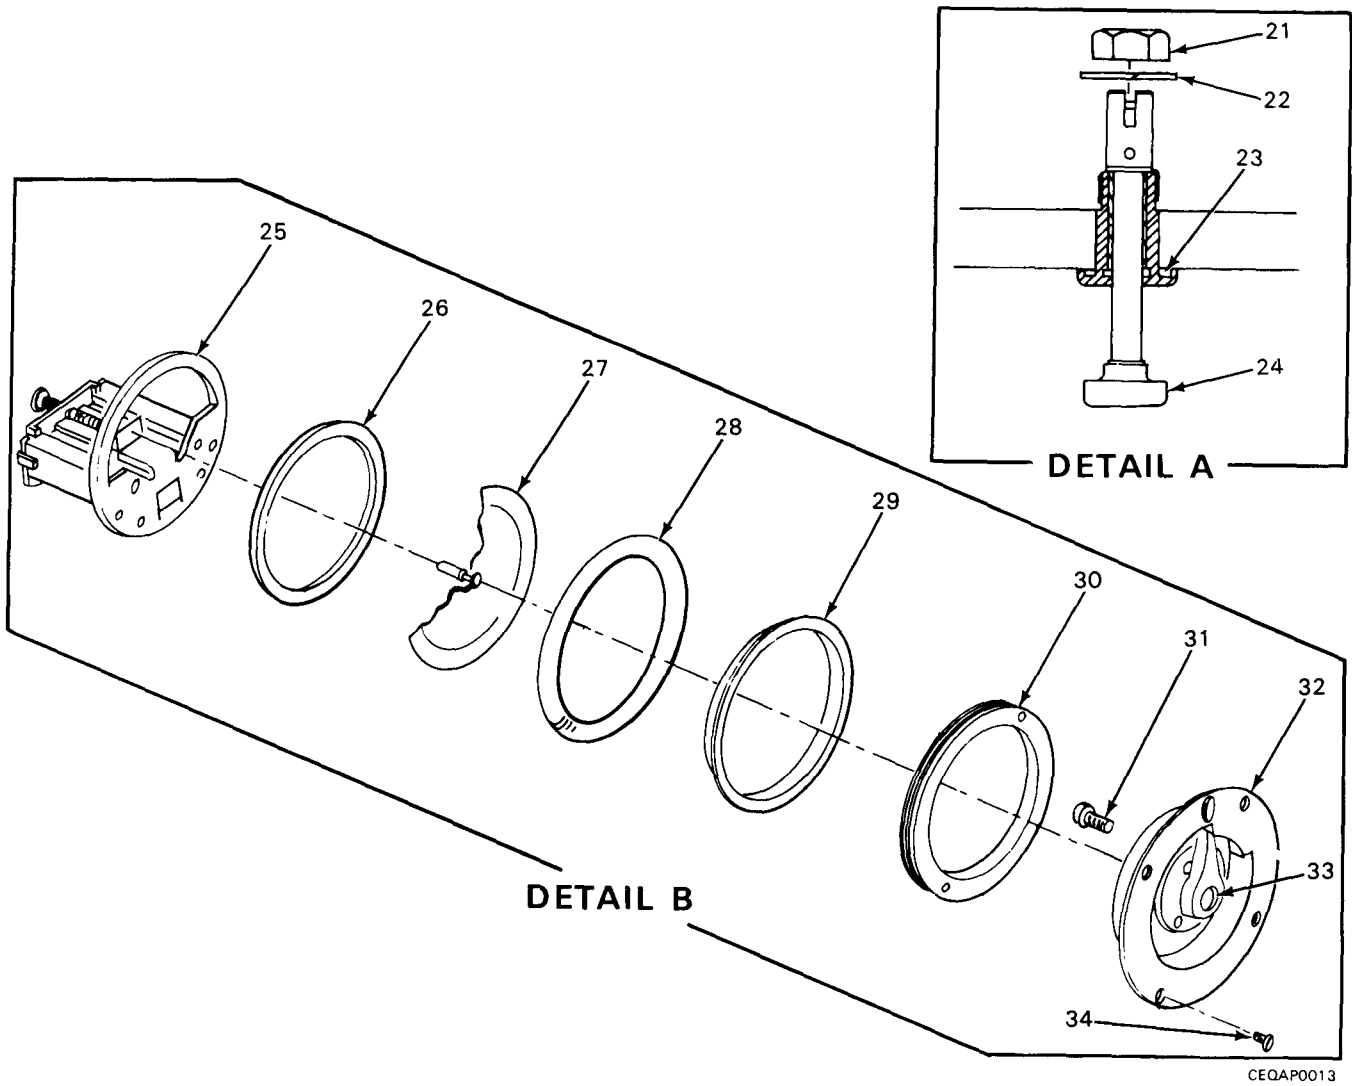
Panel Assembly (AN/GRA-39A, B, and C) (Sheet 2 of 2)
